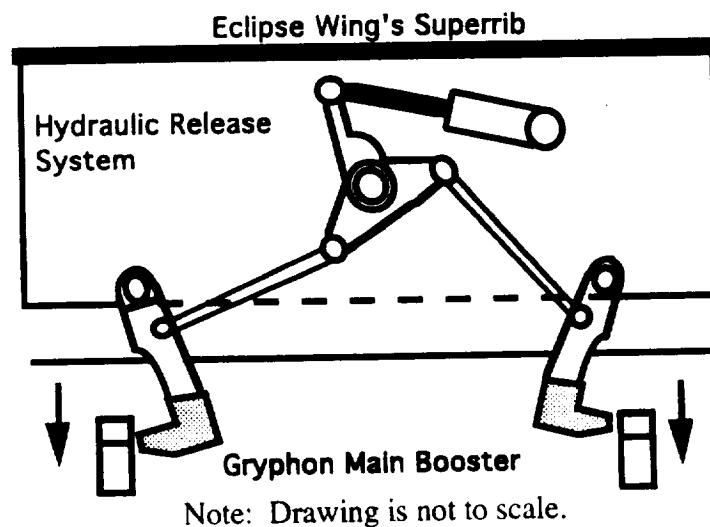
Side View Layout of Release Mechanism Geometry (After)
